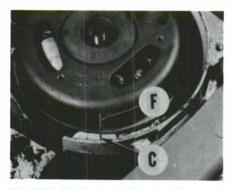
Flywheel mark (F) and crankcase mark (C) should be aligned for correct ignition timing on early models with earlier style Bosch capacitor discharge ignition. Most models with breakerpoint ignition have similar marks.
